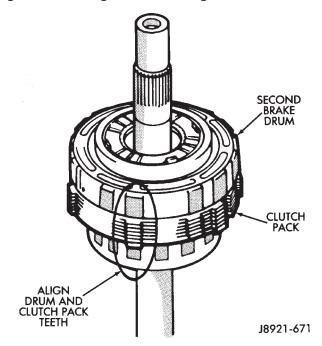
Aligning Second Brake Drum And Clutch Pack Teeth
